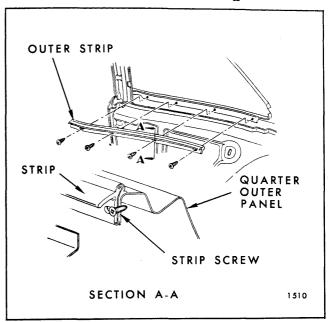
Rear Quarter Window Outer Strip Assembly -All Closed Styles
